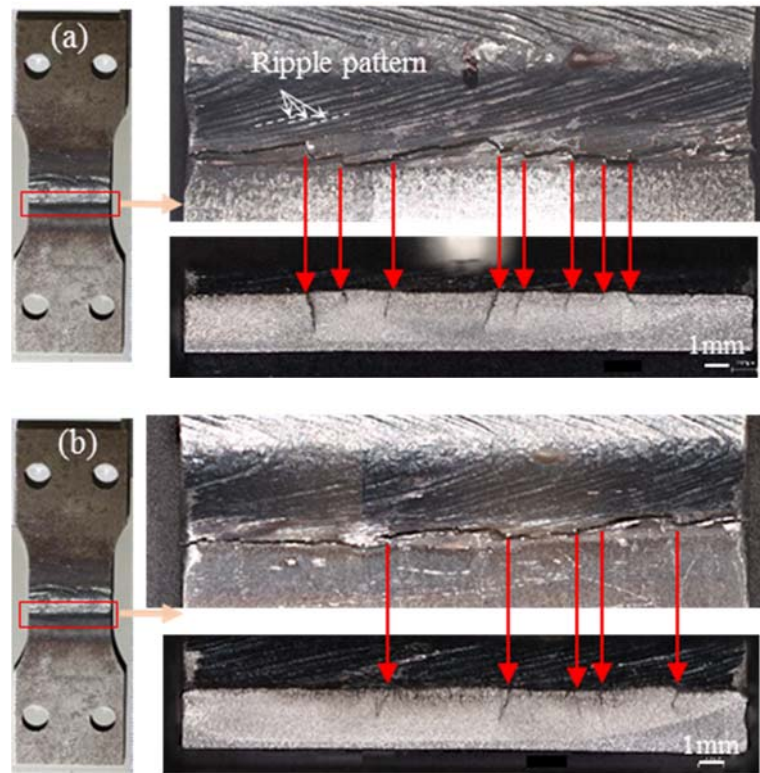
Fracture surfaces after fatigue tests. (a) Joggled lap joint, (b) conventional lap joint.
